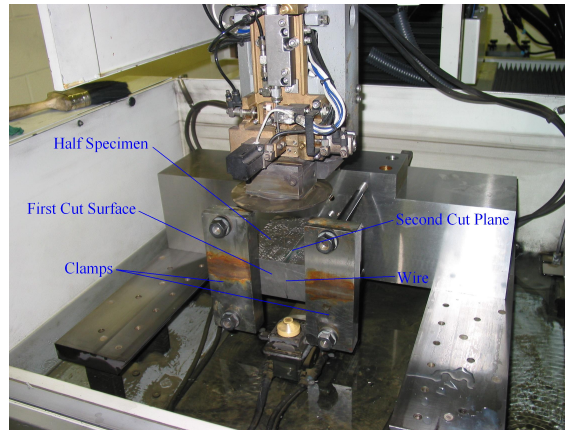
Half of the original specimen and the clamping fixture to execute the 2nd cut on the EDM machine.
